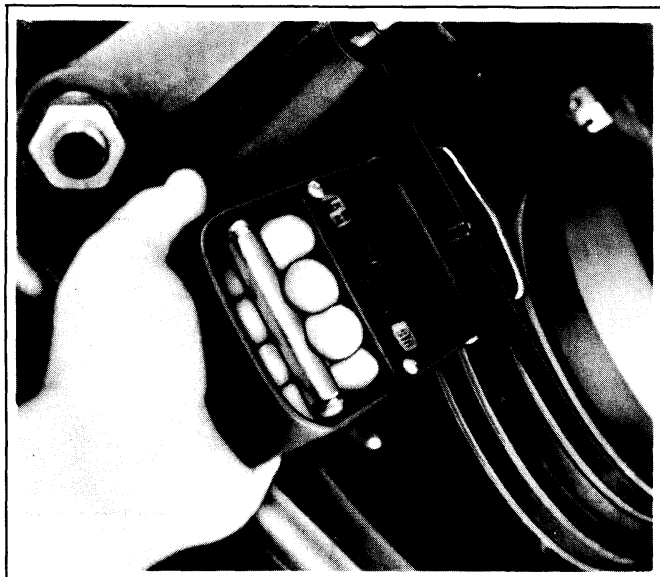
B-46--Checking Belt Tension with Tool J-23600
